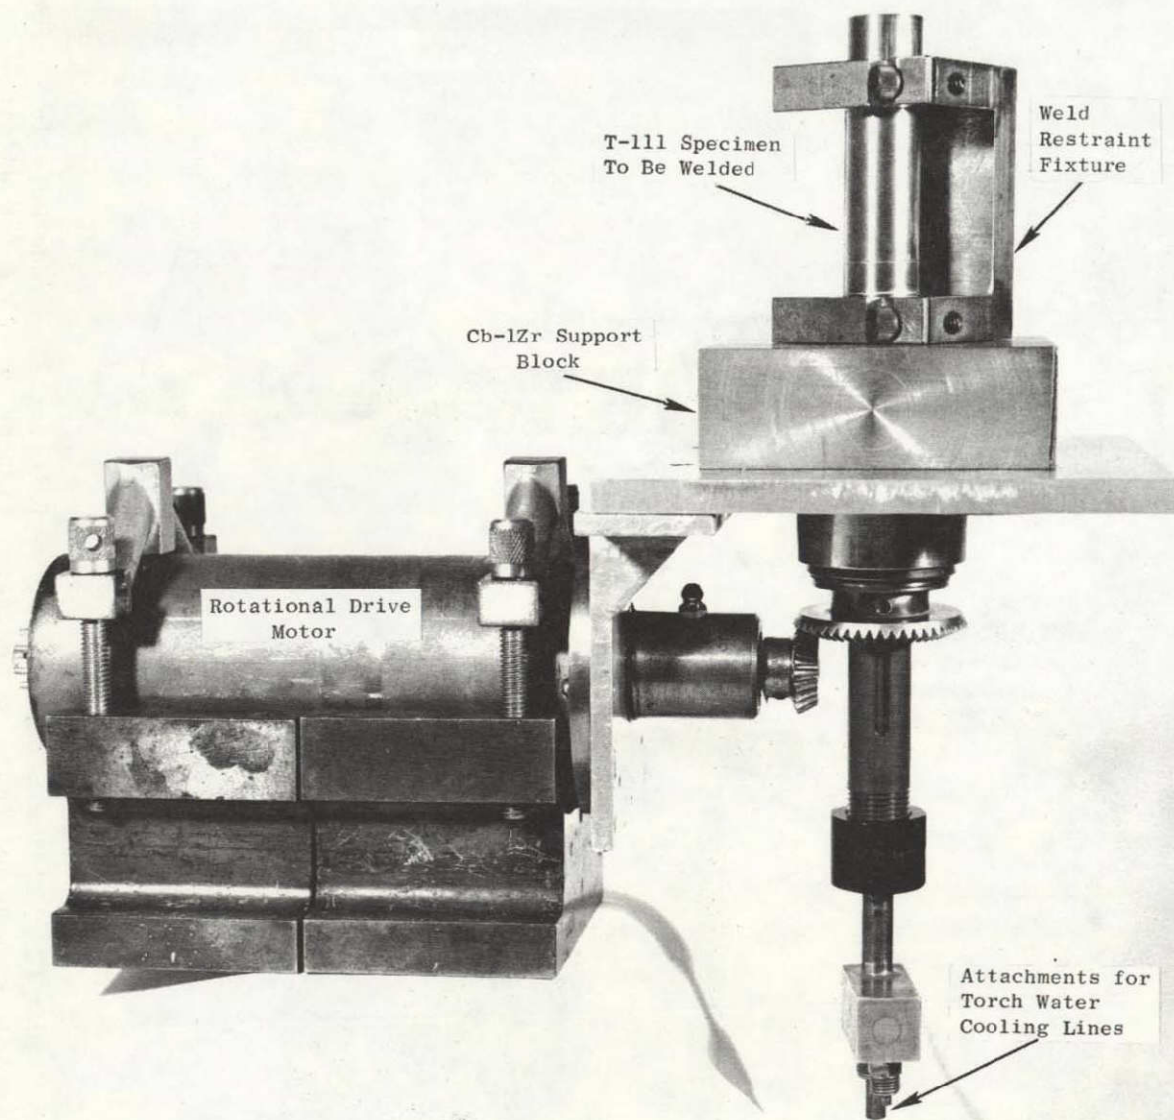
Tube-to-Header GTA Welding Setup with Drive Unit for Electrode Rotation-After Positioning Specimen and Tantalum Restraint Fixture in Place for Welding. (70-6-13C)
